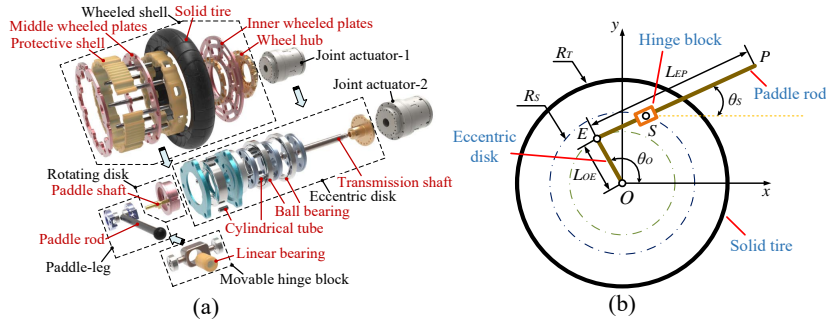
Mechanism design of the 2-DOF ePaddle. (a) Components. (b) Geometrical representation.
